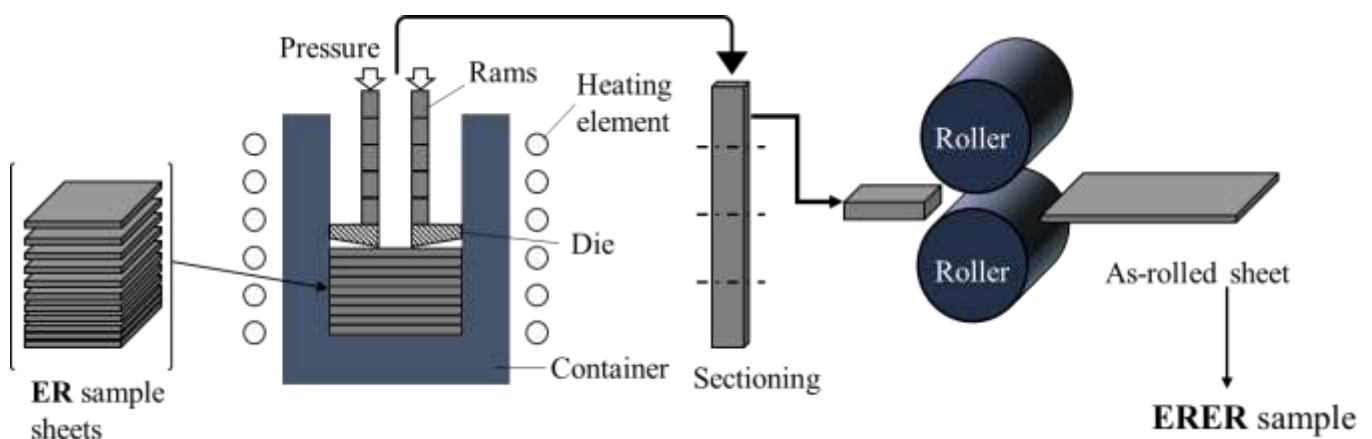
Schematic drawing of the multi extrusion-rolling process
